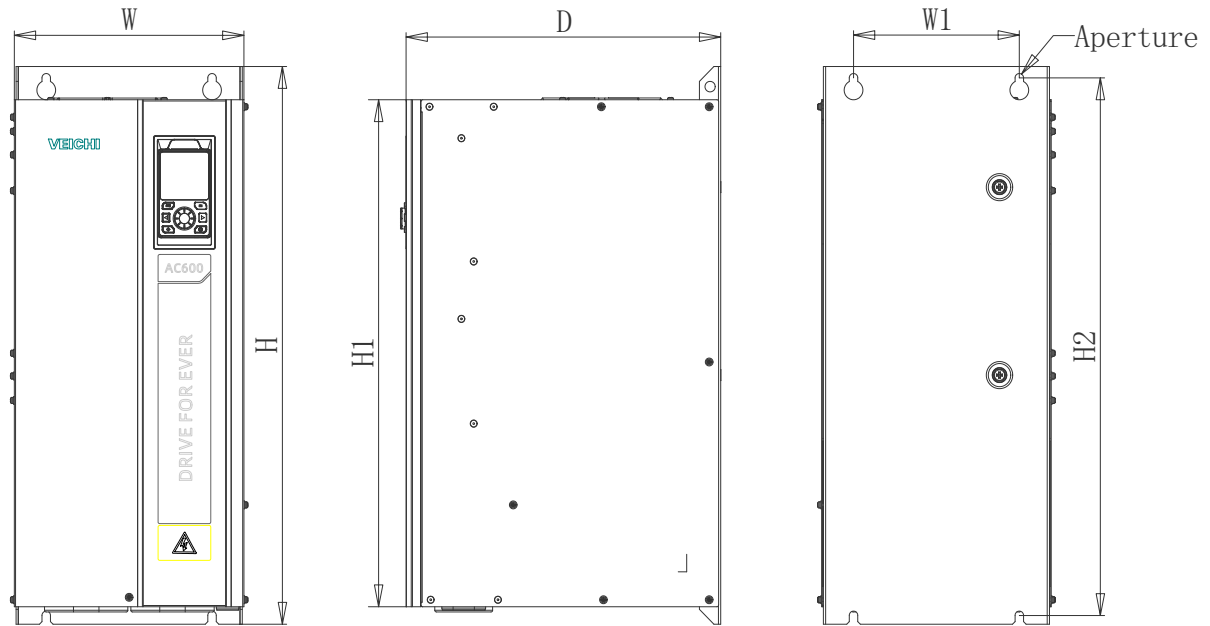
V6~V11 Overall Dimensions and Hole Size
